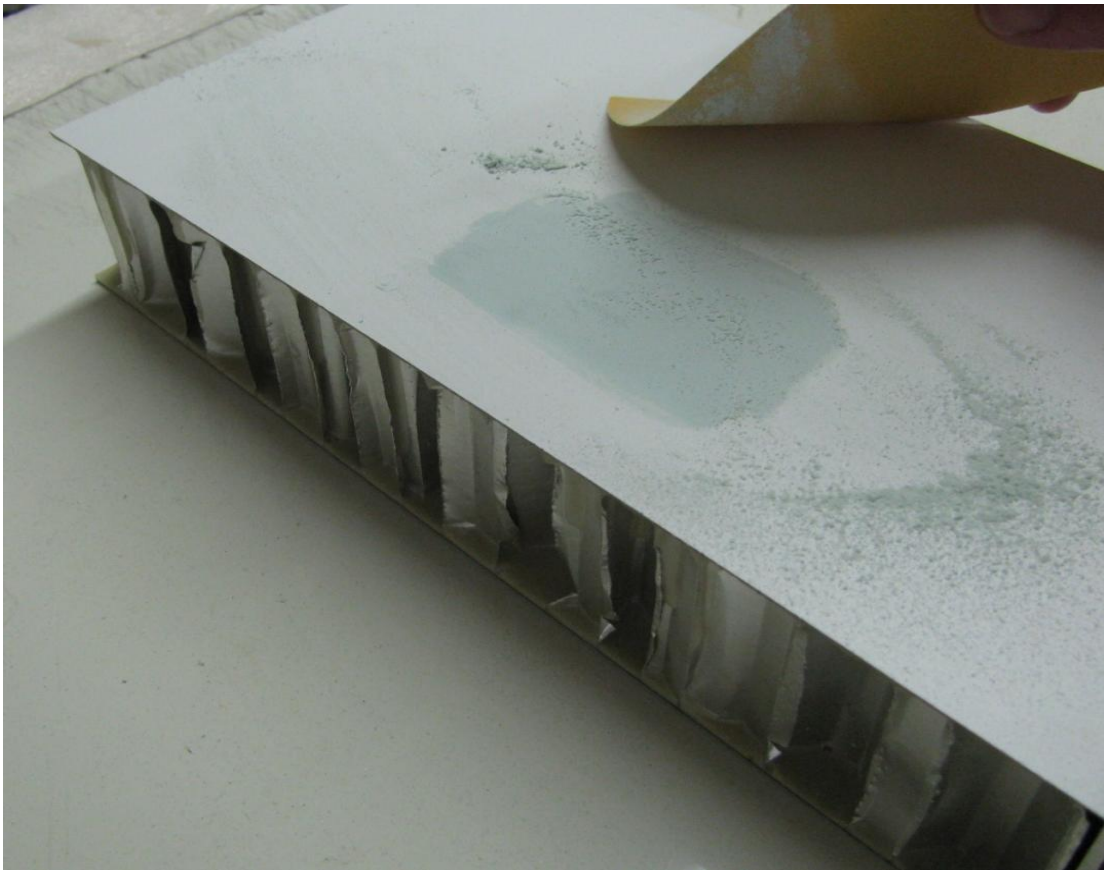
After filler material cures, sand with 180 grit sandpaper.
